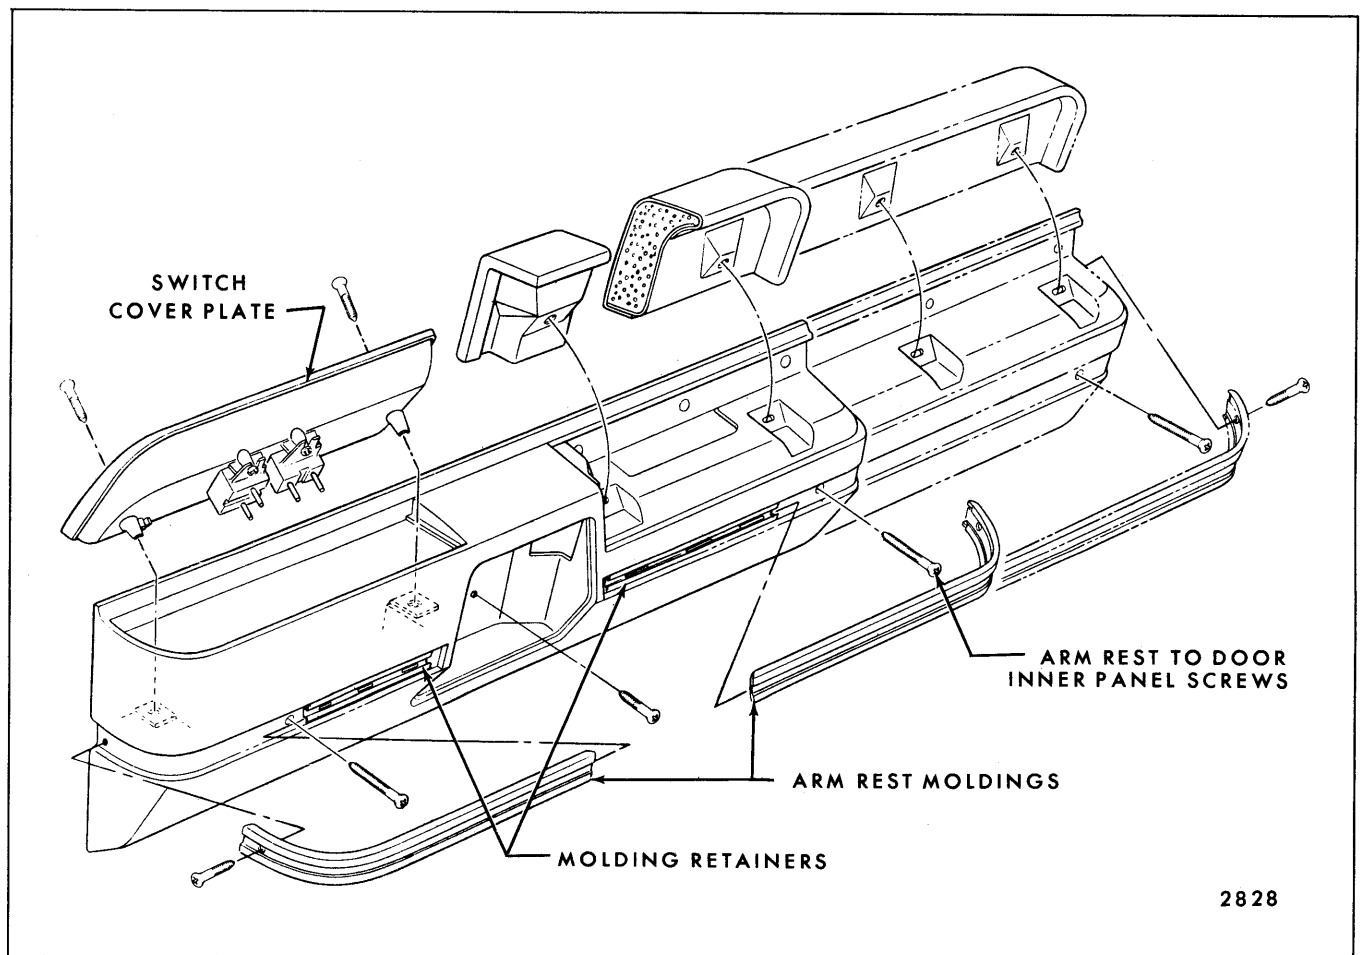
Door Trim Pad Removal - Oldsmobile - Buick "C" Styles
